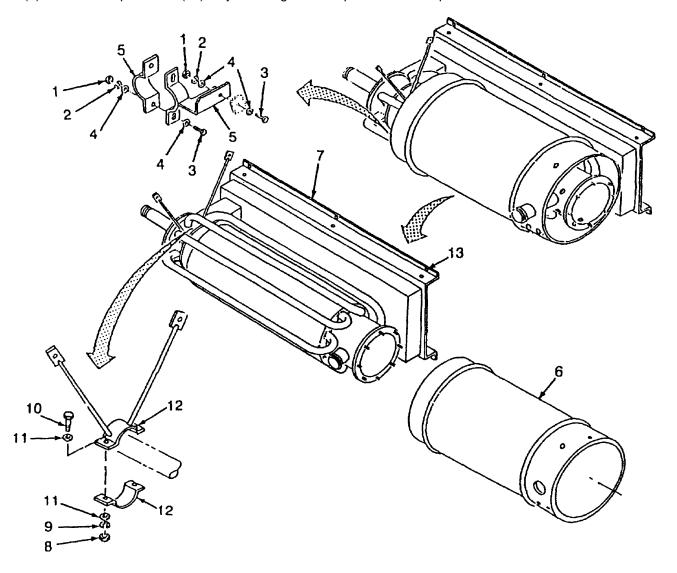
Heat Exchanger, (Model H120) Disassembly
